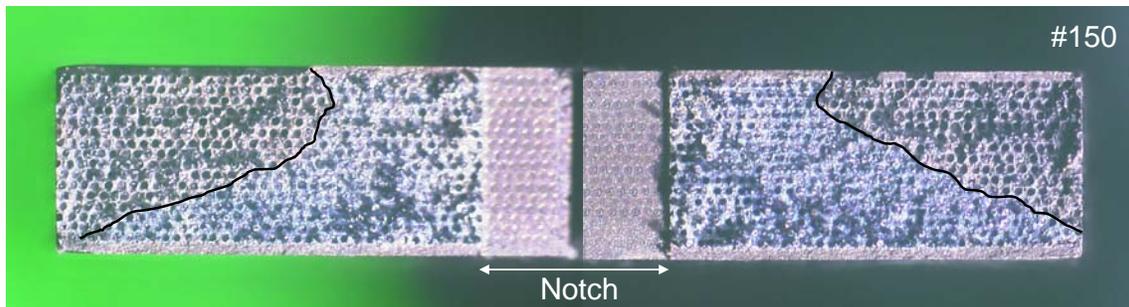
FCG Specimen Fracture Surface with Crack Front Profile Highlighted
